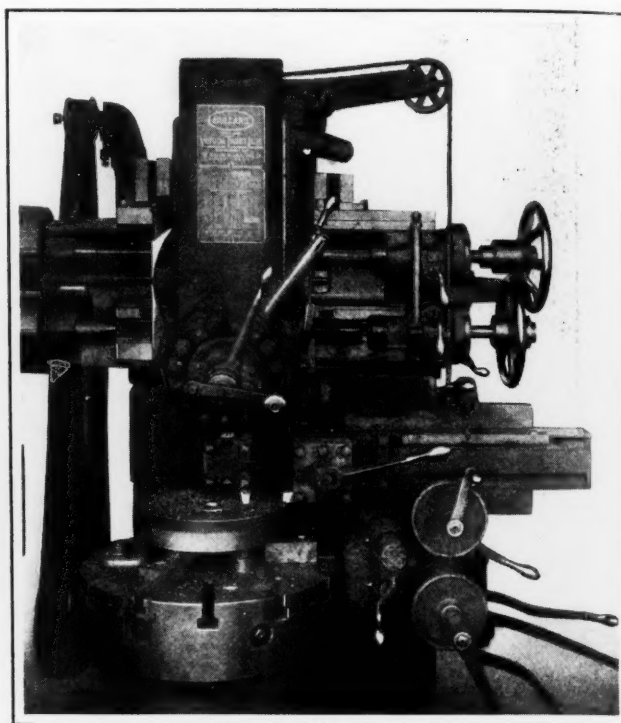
Second Chucking in the Vertical Turret Lathe—roughing the Engine Side of the Flywheel
